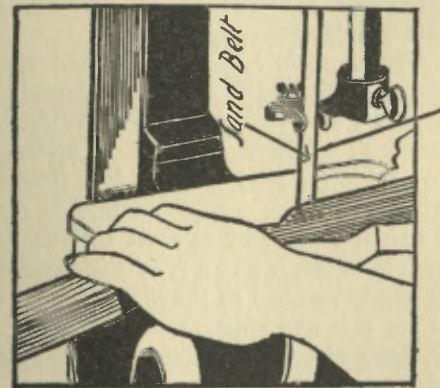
DELTA BAND SAW BELT SANDING ATTACHMENT
